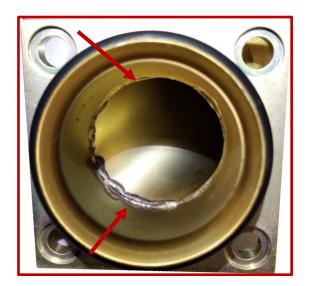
Examples of Non-Conforming Internal Welds Joints
